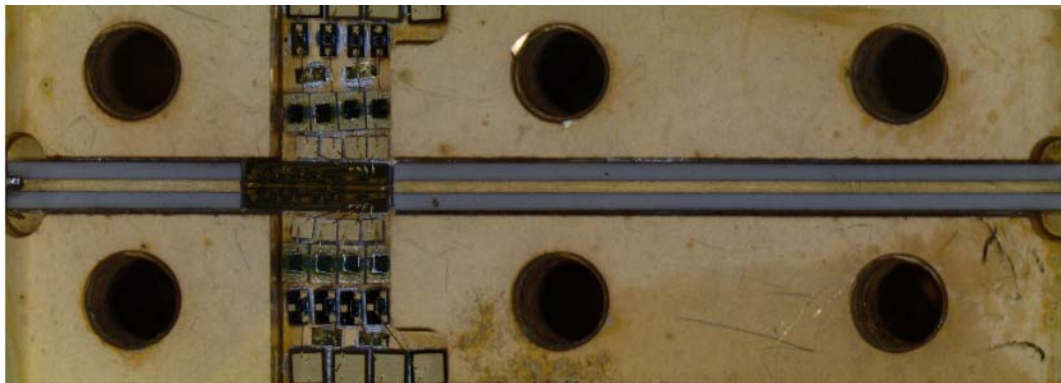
Detail of the MMIC LNA assembly inside the chassis.
